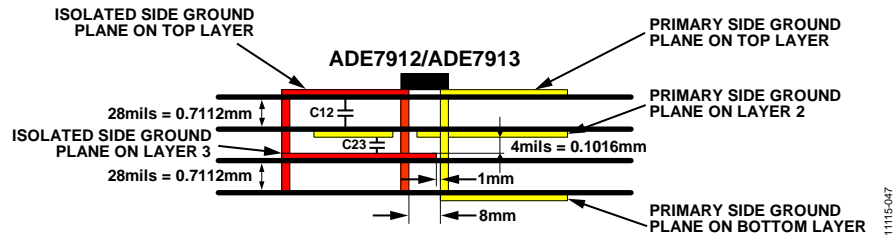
Stitching Capacitors Created by 4-Layer PCB
